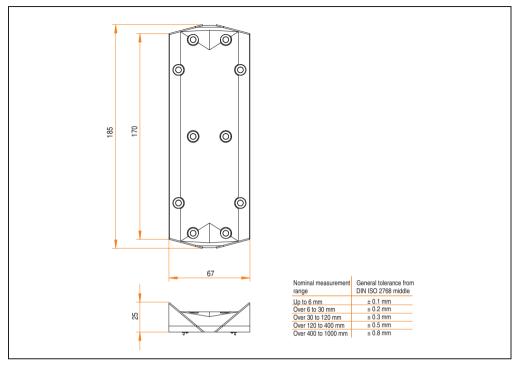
Dimensions - extension connector 5AC800.CON1-00
